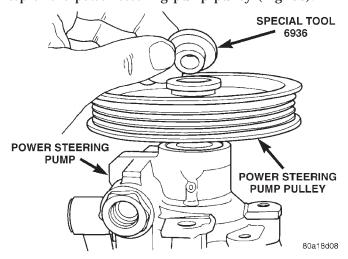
Spacer Correctly Installed On Power Steering Pump Pulley
